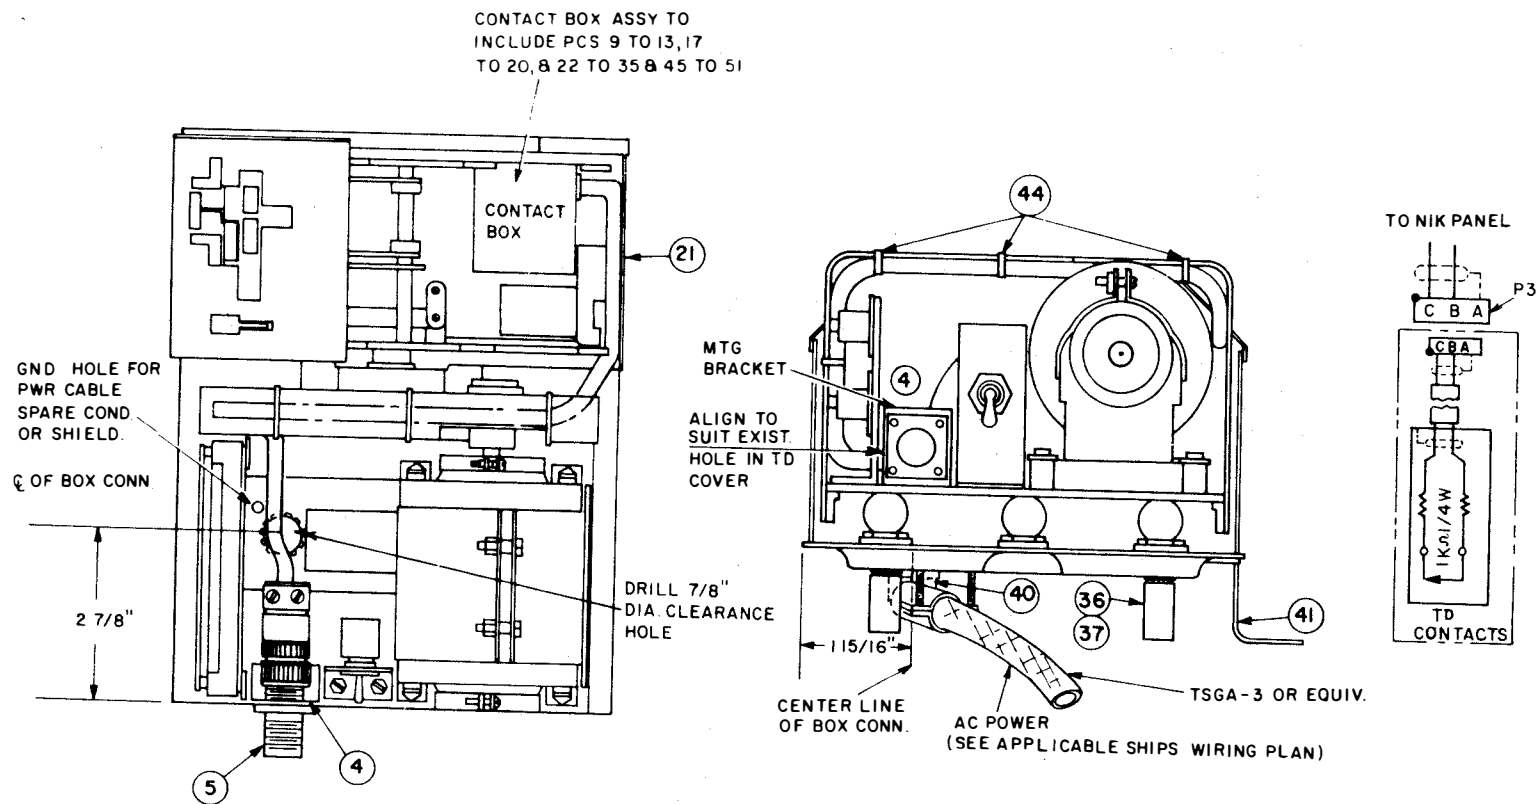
TT-187A/UG and TT-187B/UG Installation Drawing (Part 1)
